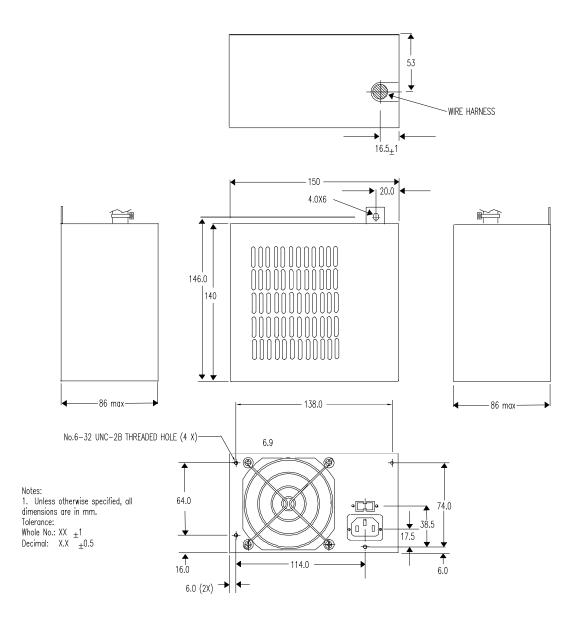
ATX Power supply mechanical diagram (all dimensions in millimeters)
